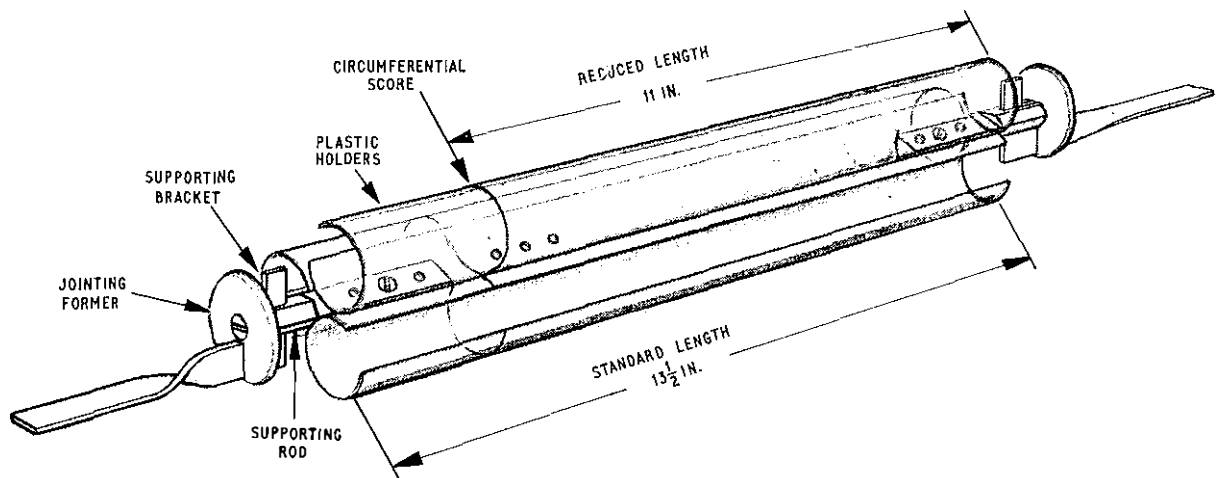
CRADLE USED FOR MOUNTING THREE UNICOIL HOLDERS
